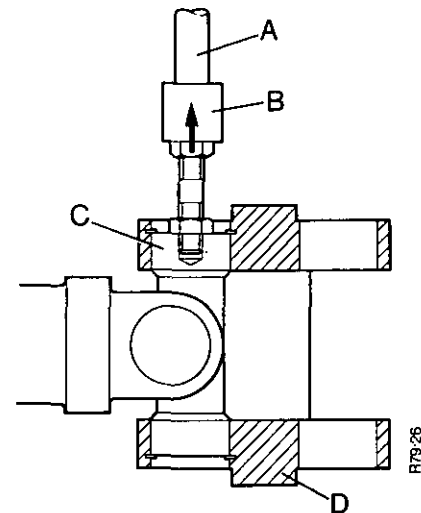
REMOVING CUPS FROM CENTRE HOUSING OF UNIVERSAL JOINT
